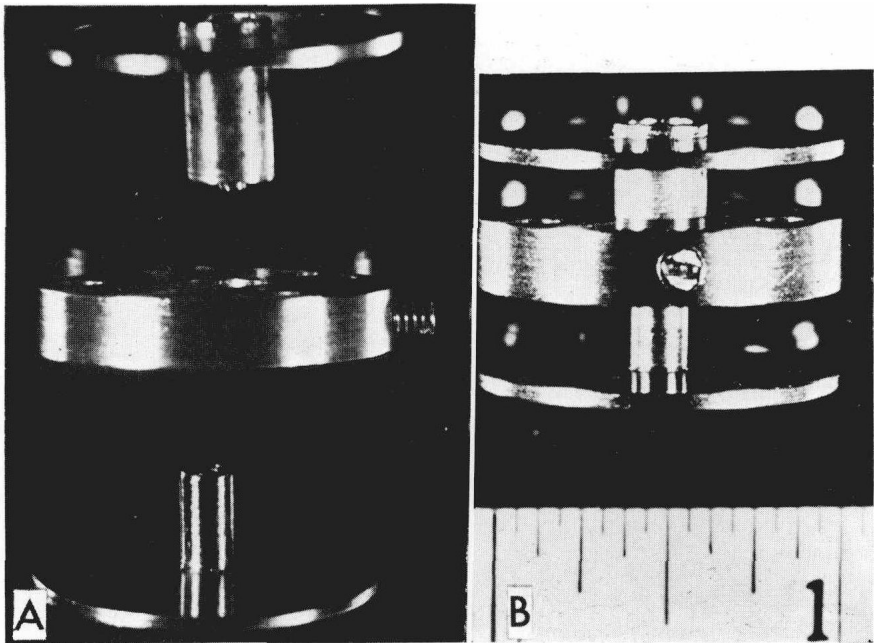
A, Parts of the compressor unit machined from stainless steel.
